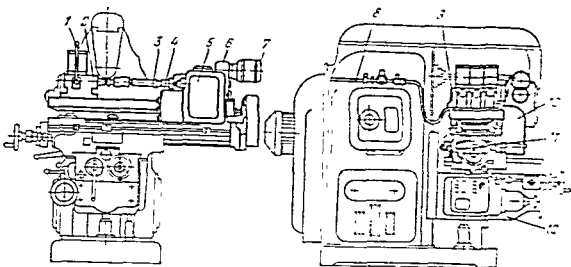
Semiautomatic three-position milling machine, model VII-10, for milling helical flutes of end mills.
